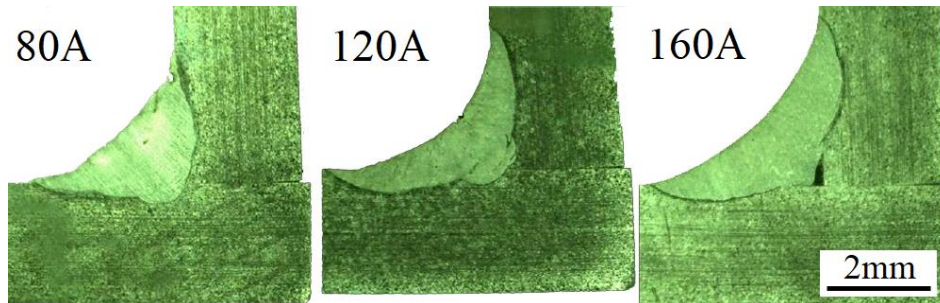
Effect of welding current on the weld geometry – specimens from group E
